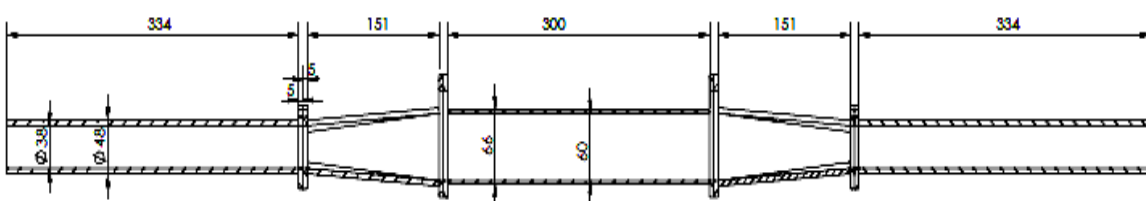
Schematic layout of exhaust heat exchanger (test section 60 × 60 × 300 mm) (D-type).
